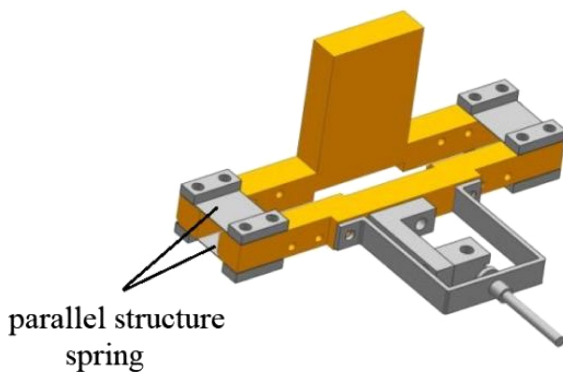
Grating ruling tool carrier with a parallel-spring mechanism.
